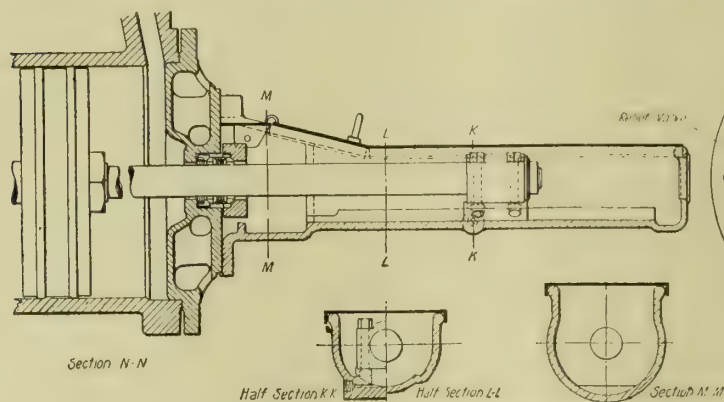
PISTON ROD EXTENSION GUIDE.
